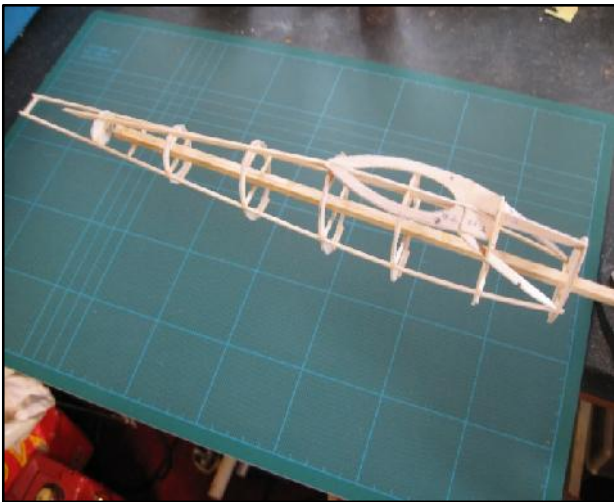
Start of fuselage frame assembly, showing temporary 3/16" sq. jig, which is held in a vice in this photo.
